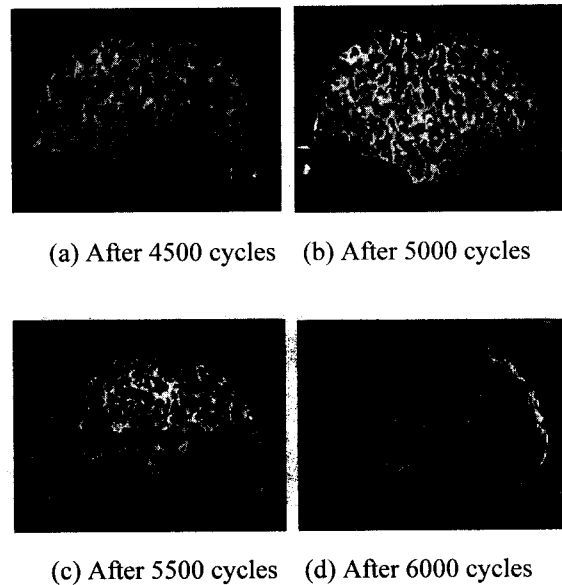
Cross sectional view of solder joints with underfill (thermal cycling between 208K and 423K)
